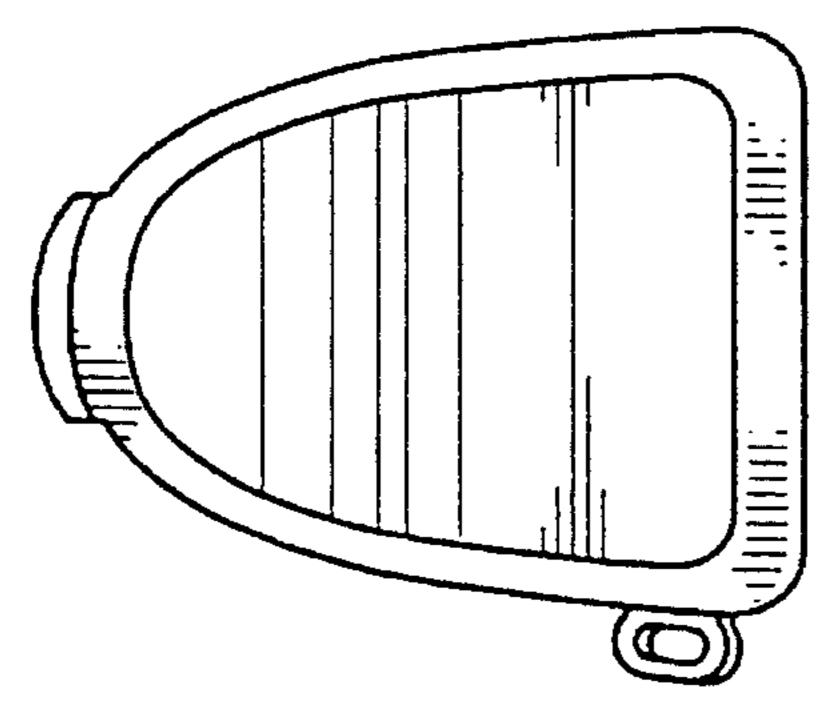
is a perspective view illustrating the relief tube with top open and with the storage bag attachment ring removed; and,
